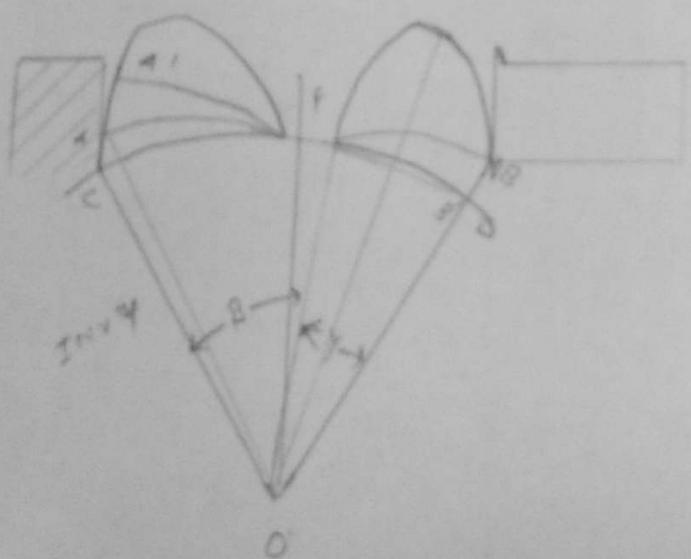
MEASUREMENT OF TOOTH THICKNESS
